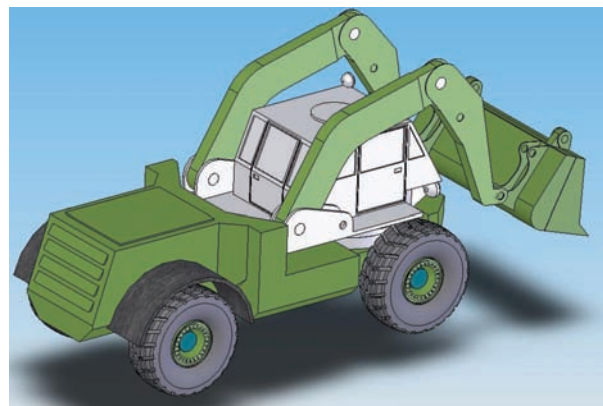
General view of Multi-task Engineering Machine WMI-PINIA concept with two-part bucket of loader
